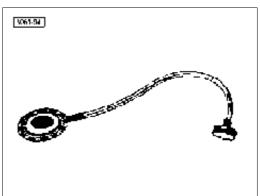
No. 5.9030.640.0 equipment for tightening the cylinder head securing screws angularly.
